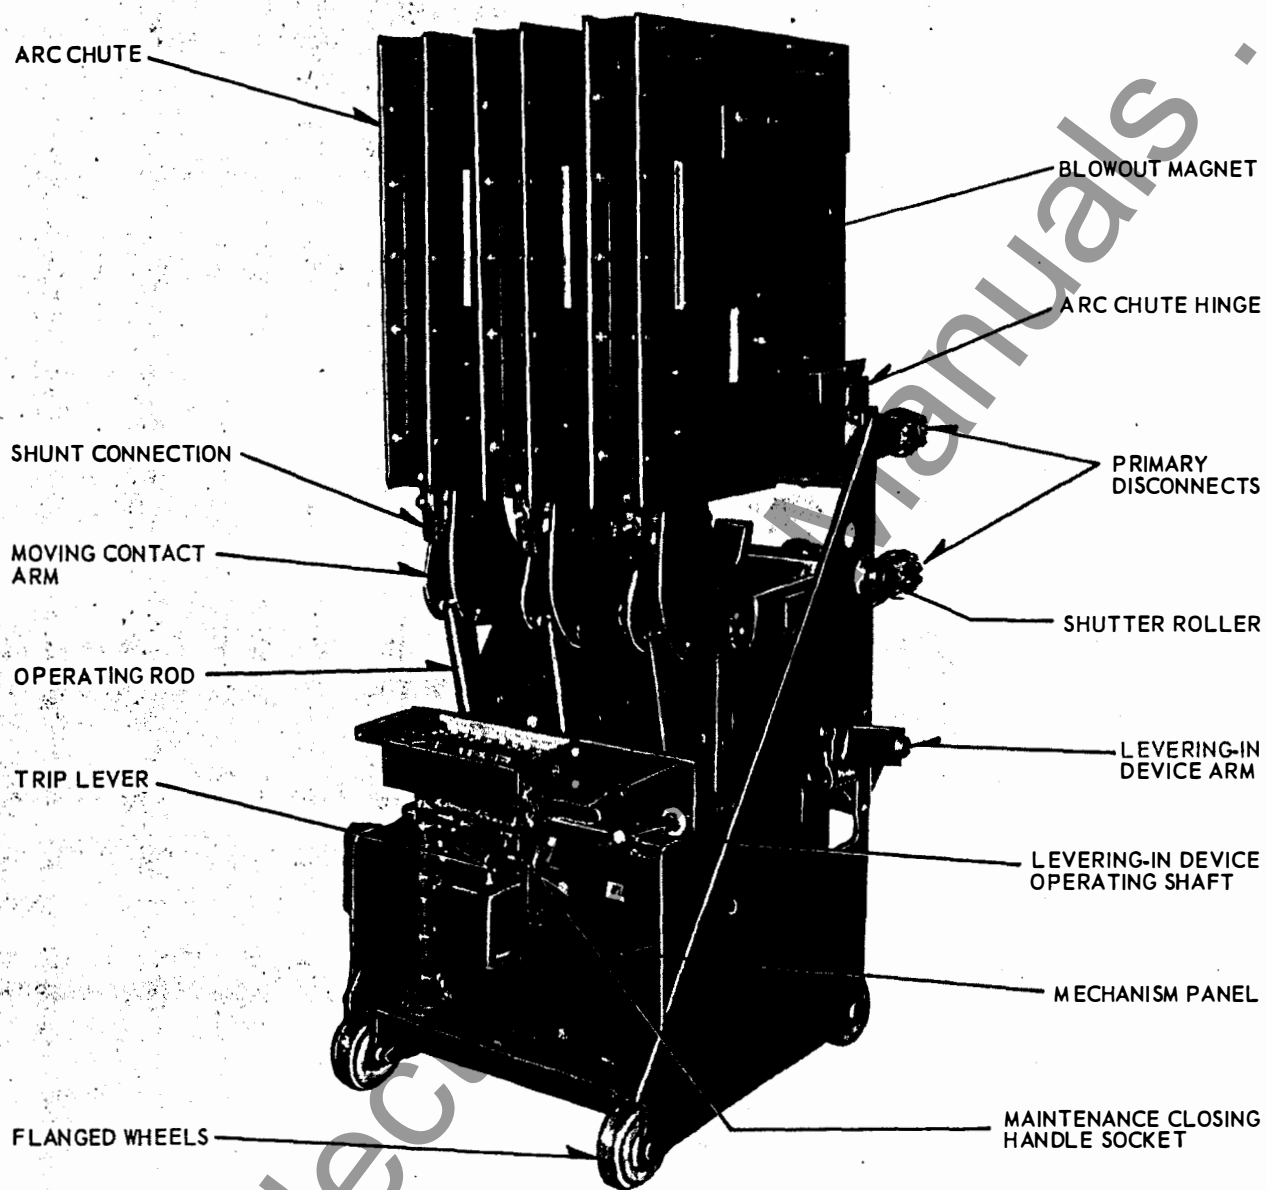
Type 50-DH-250-E, 1200 Ampere Breaker with Barrier removed, Front View
